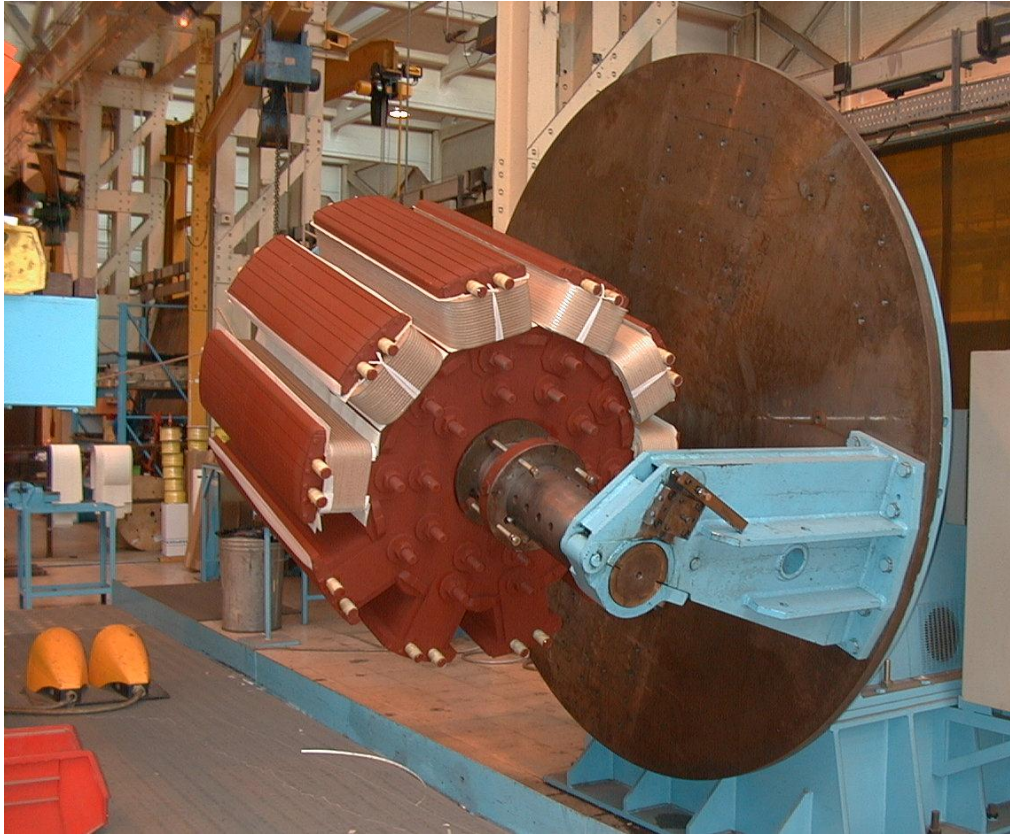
Photo of the field winding being added to a 10 pole rotor body of similar rotor construction to Saxi
